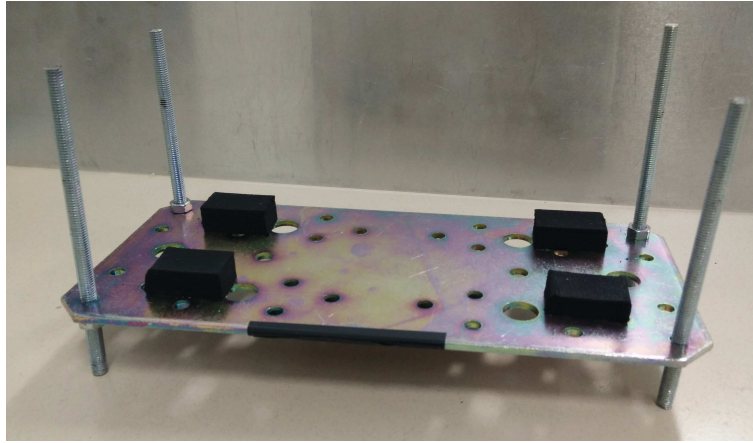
Dampers and lower part of the external structure, with connecting screws.
